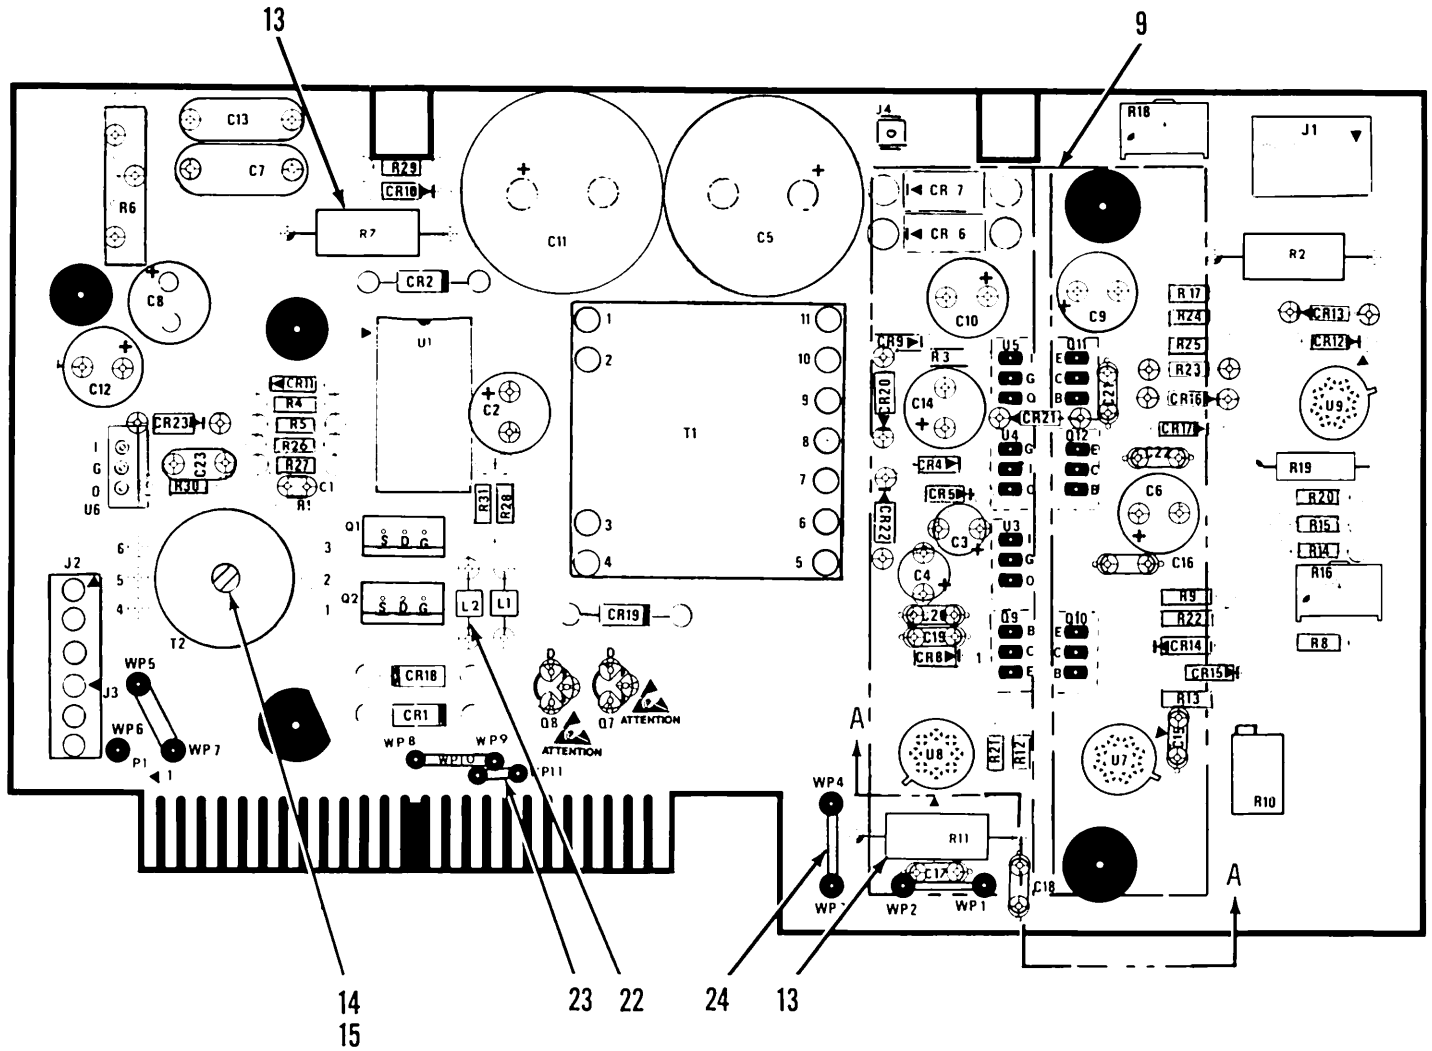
HIGH VOLTAGE PCB ASSEMBLY
